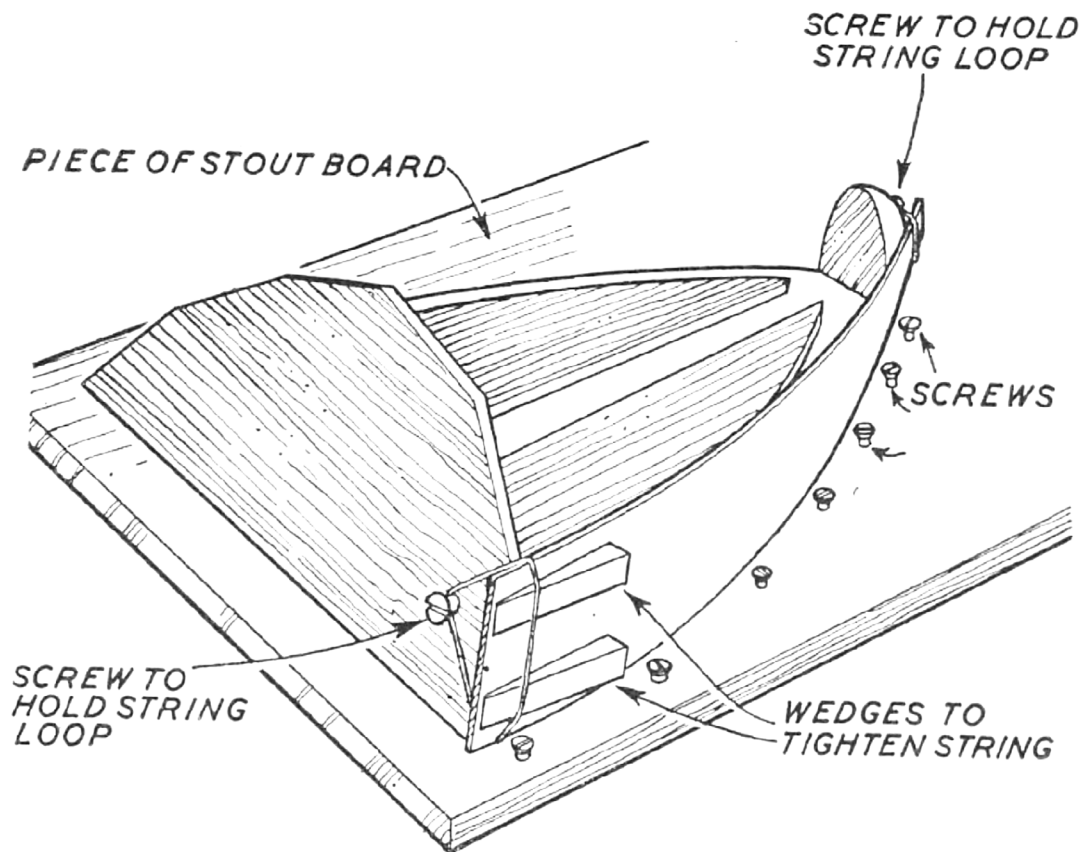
FITTING THE BACK RIBS. Note that the assembly is screwed to a stout piece of board.
